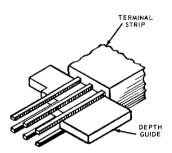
Method of Using Depth Guide for Soldered Connections on Terminal Strips.
